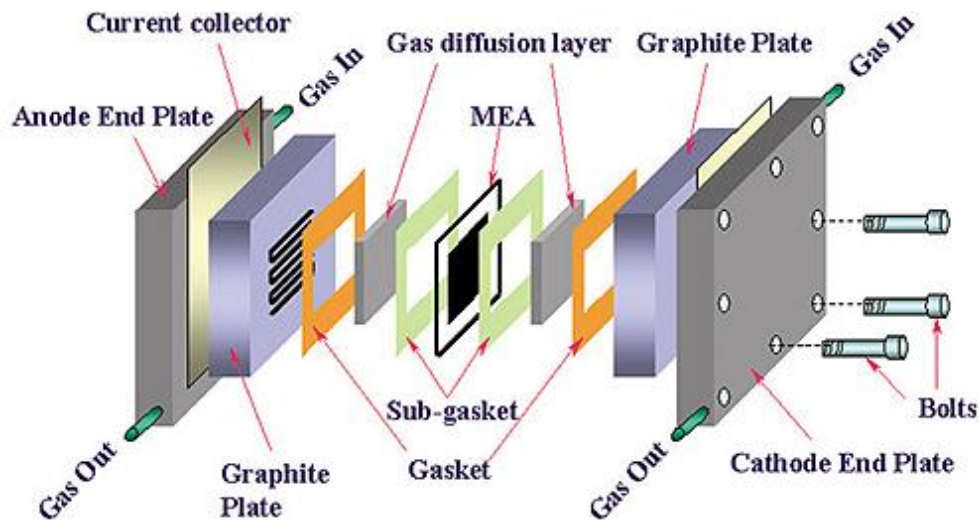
Typical Fuel cell exploded view with all the major components such as electrodes, membrane electrode assembly (MEA), gas diffusion layers, graphite plates, and bipolar end plates[29].
